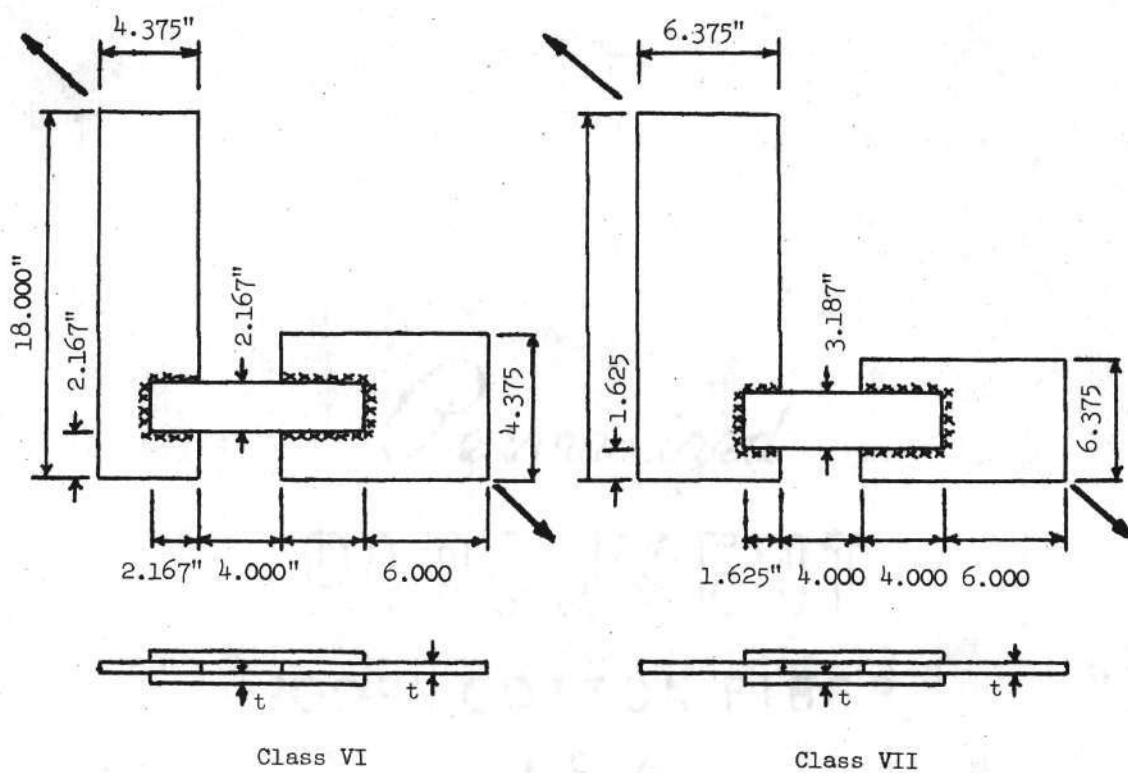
Test Specimens Loaded in Shear, Torsional Moment and Tension
